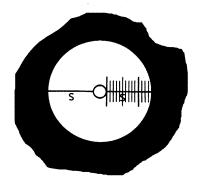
Measurement of a film section consisting of a single layer using microscope Single coating (s = measuring distance)
